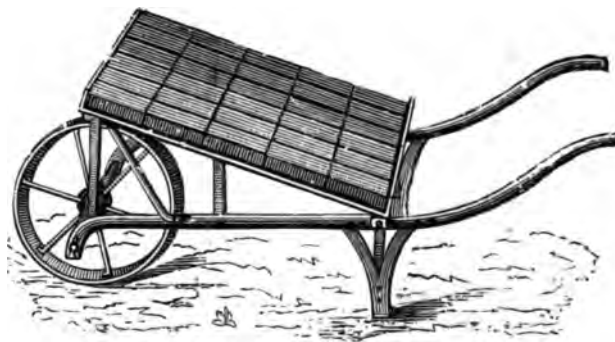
One-wheeled Iron Barrow for transporting Fresh Bricks (Paupier).
